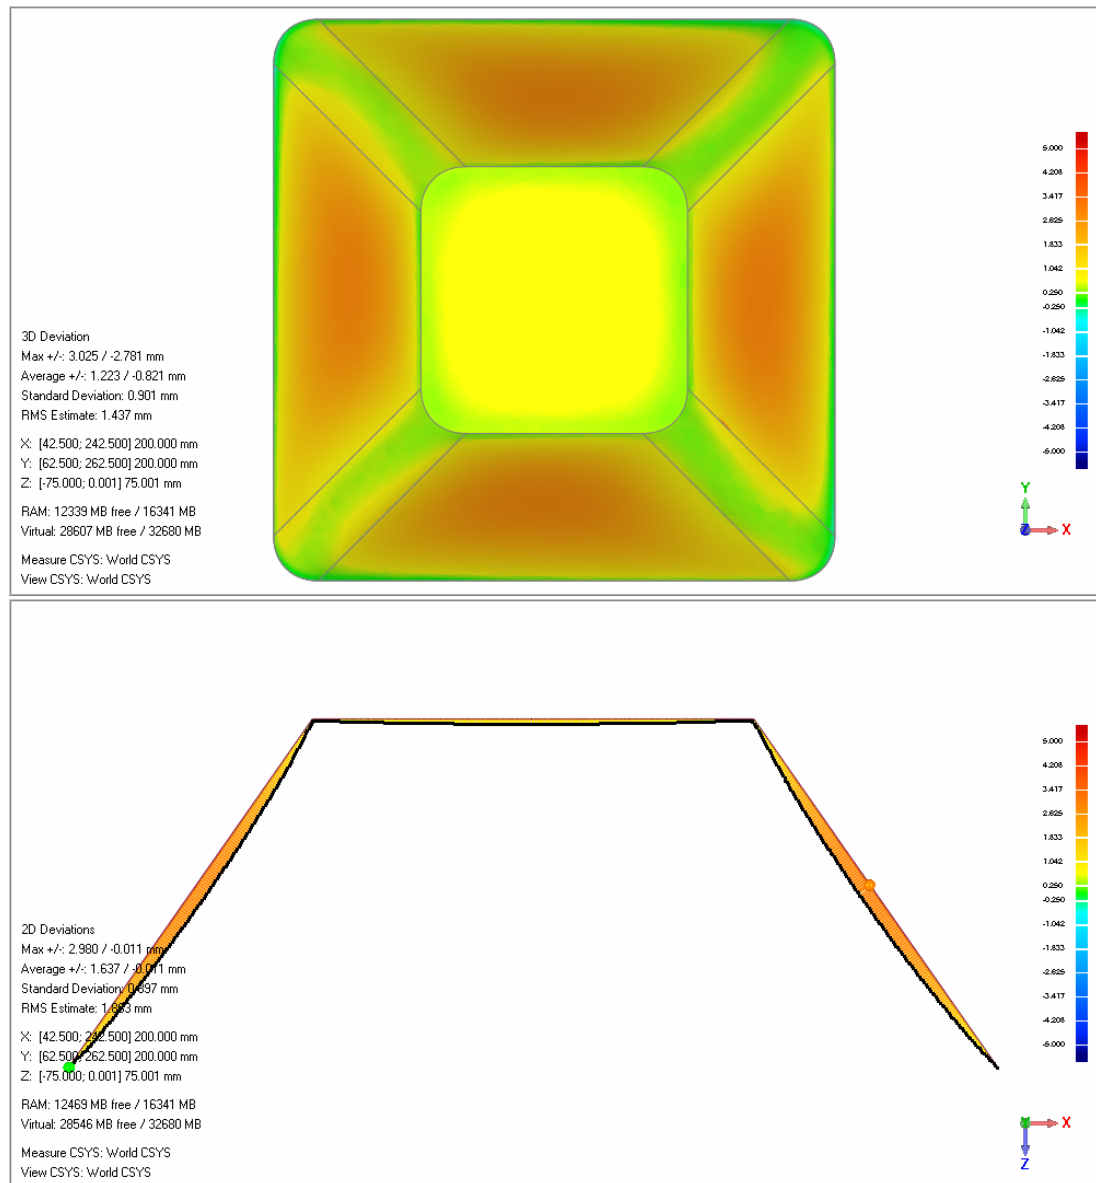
Part T1B geometric accuracy results - top view and cross-section view
